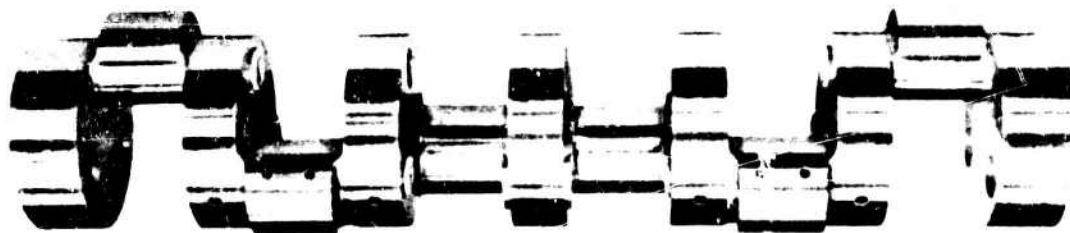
Unique Barrel-Type Crankshaft for VHO Engine
